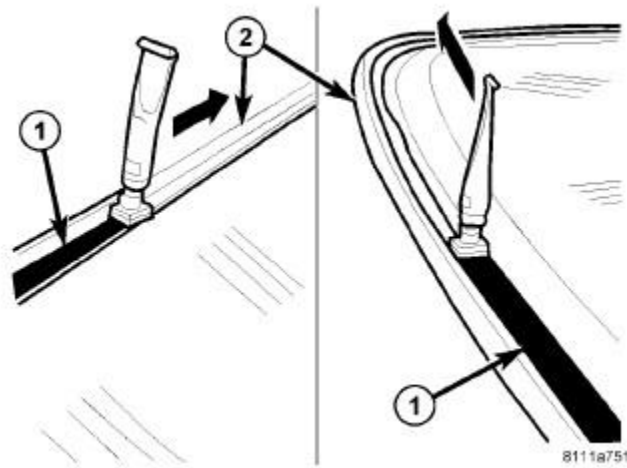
Applying Primer To Gluing Surface Of Windshield Seal
